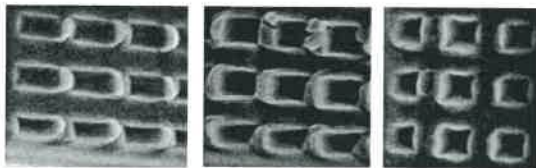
Nano-features created with Ultramill elliptical actuator. Left shows tool too slow, center shows tool too fast and right shows tool matching part velocity.
